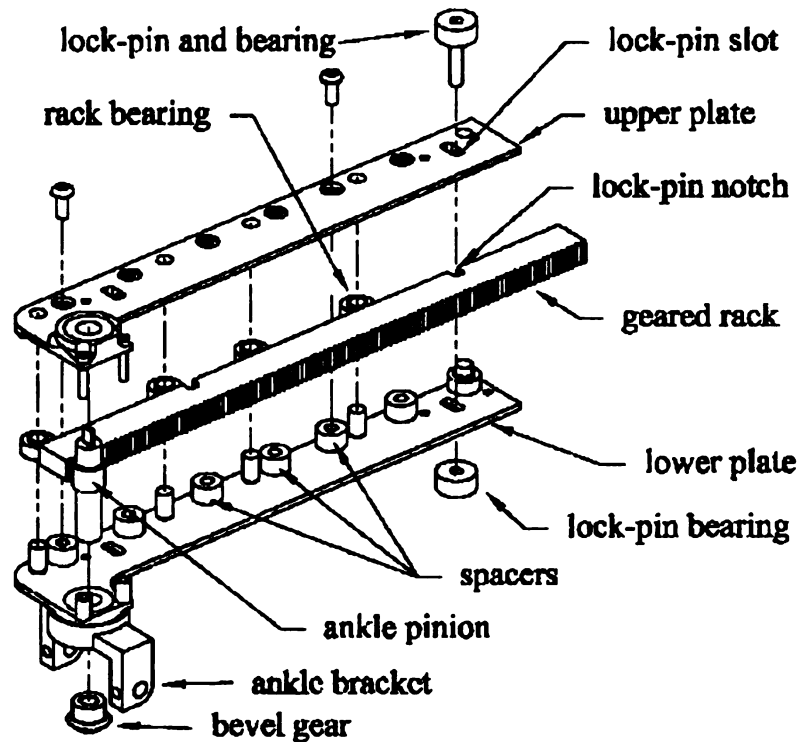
Exploded view of the CRAWLER rack/leg pair
